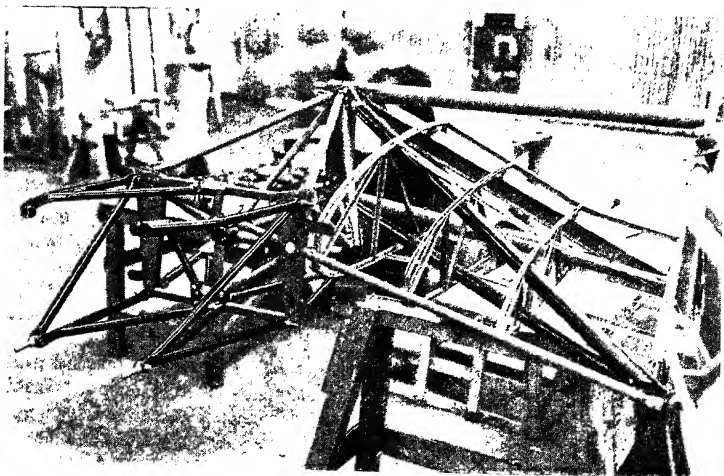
POWER PLANT ASSEMBLY, SHOWING OIL TANK IN POSITION.
